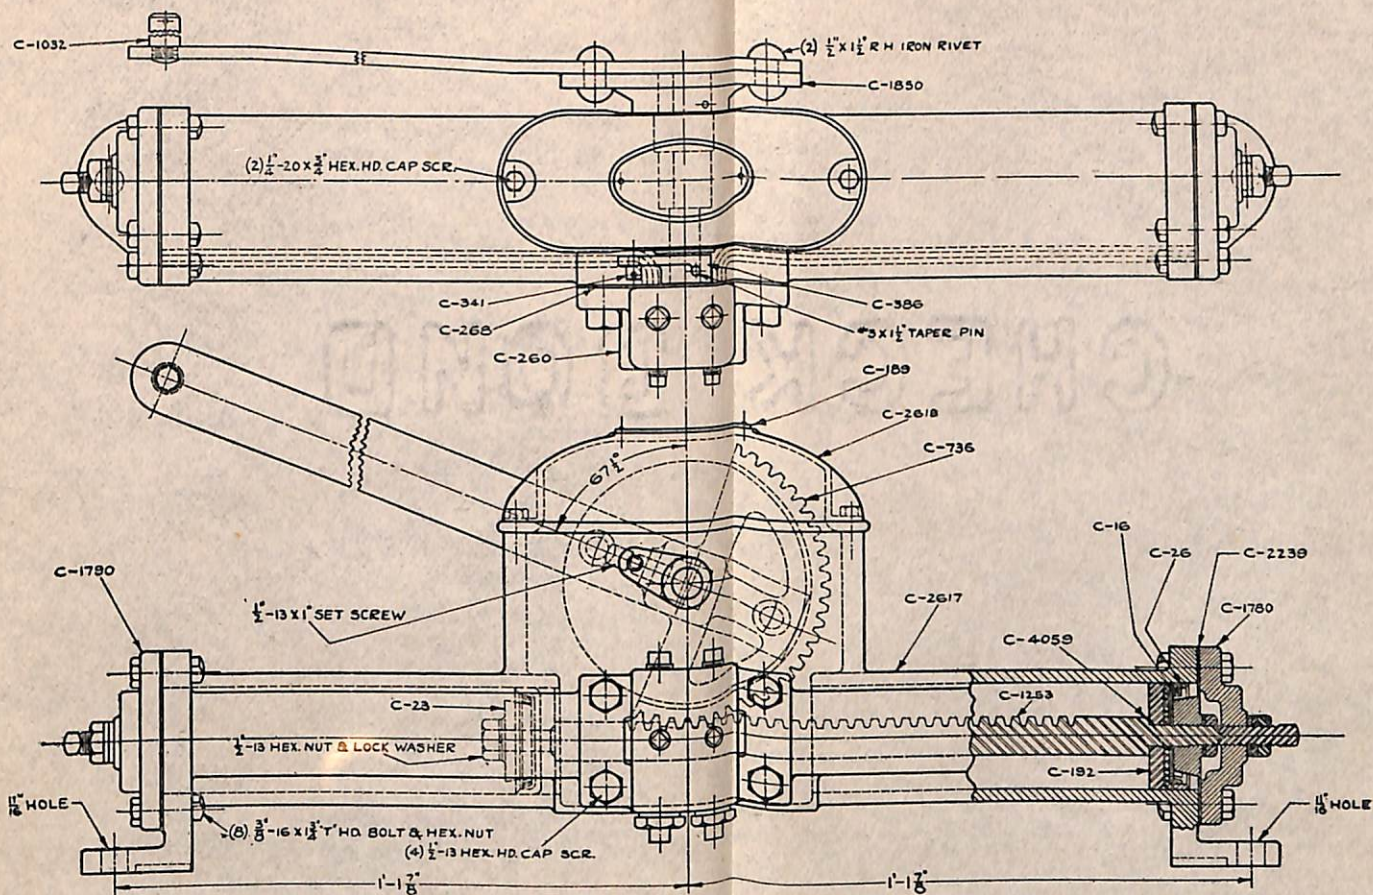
Sectional and Plan Views of Door and Step Controller for Sliding Doors
